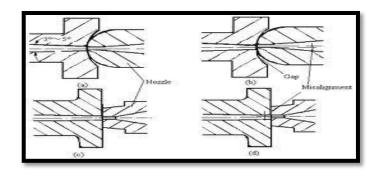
Two basic design of sprue bush, spherical recess and flat rear face
